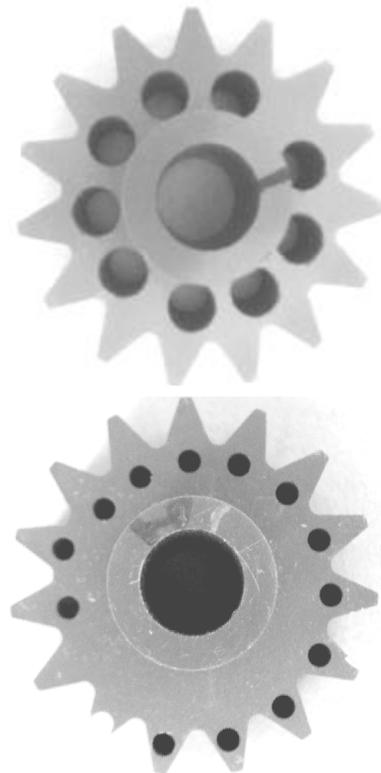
Location of a) 6.34 mm and b) 3.18 mm diameter holes drilled for machinability evaluation.
